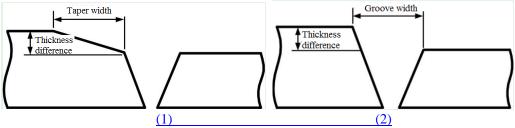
Butt welding of steel plates of different thickness
